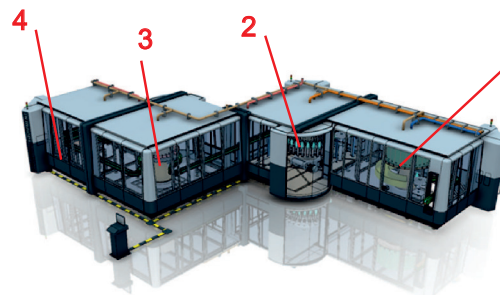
Image of the complete bottling machine, consisting of a rinsing machine (1), a filling machine (2), a capping system (3) and a labeling machine (4).
